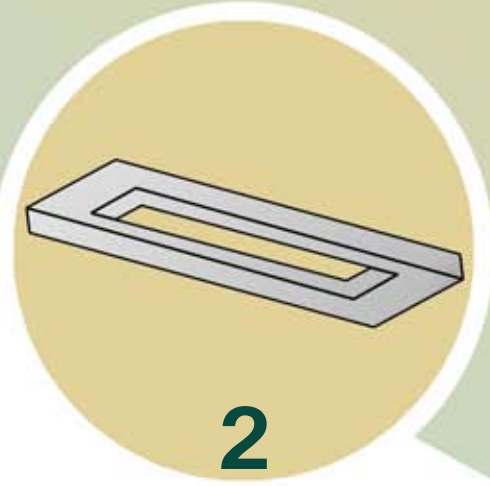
Pictured below (image 1) is a stack of 4141 Stainless Aluminum Composite. This is a new product on the market with unique properties. It's not easy clamping a frictionless material, and measuring something that partially exists in the fourth dimension can be impossible as well. But here at Compu Craft we are always up for a challenge! Pictured below are a couple of sample parts. The first is a frame weldment (image 2) made from 4141 SAC, and the second is a support assembly (image 3). No matter how simple or how challenging the part, send in your inquiries today!
